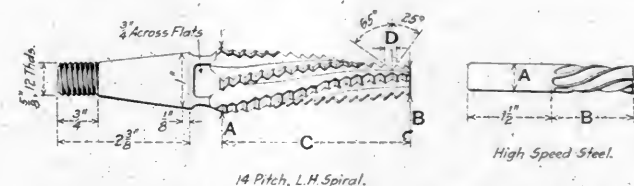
Cutter for Alligator Wrenches, and Straight Shank Side Mills
